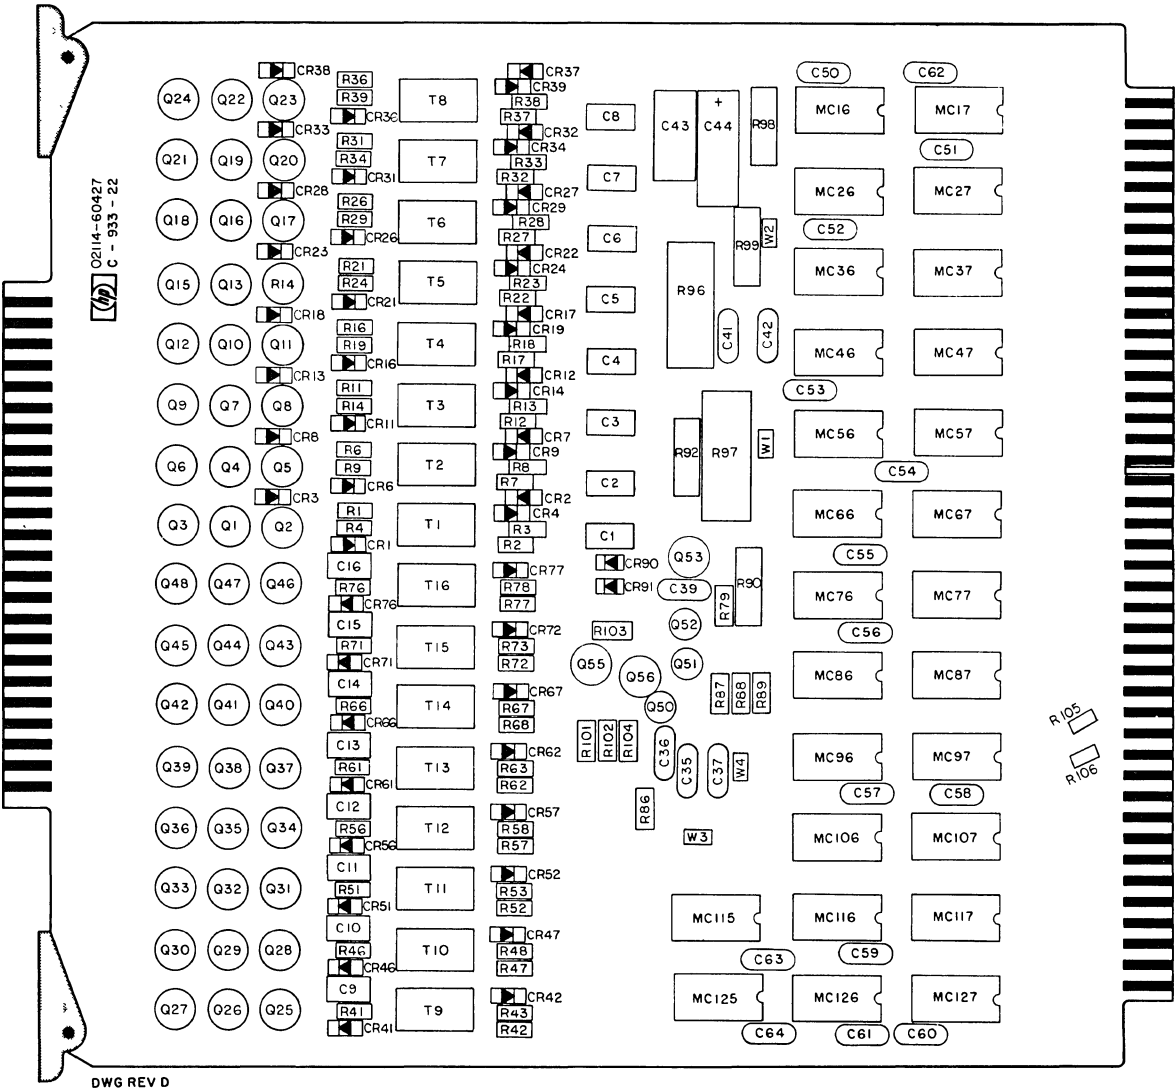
Driver/Switch Card (02114-60427), Part Location Diagram
